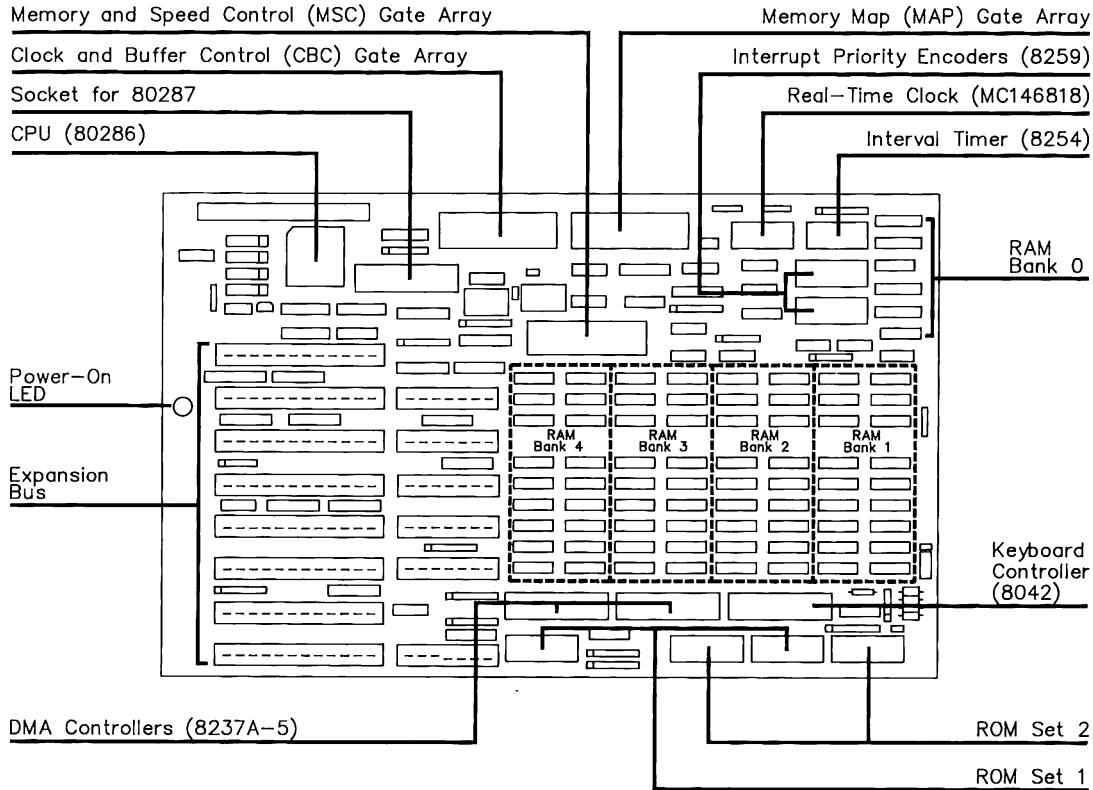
The 12-MHz COMPAQ DESKPRO 286 System Board Component Layout
